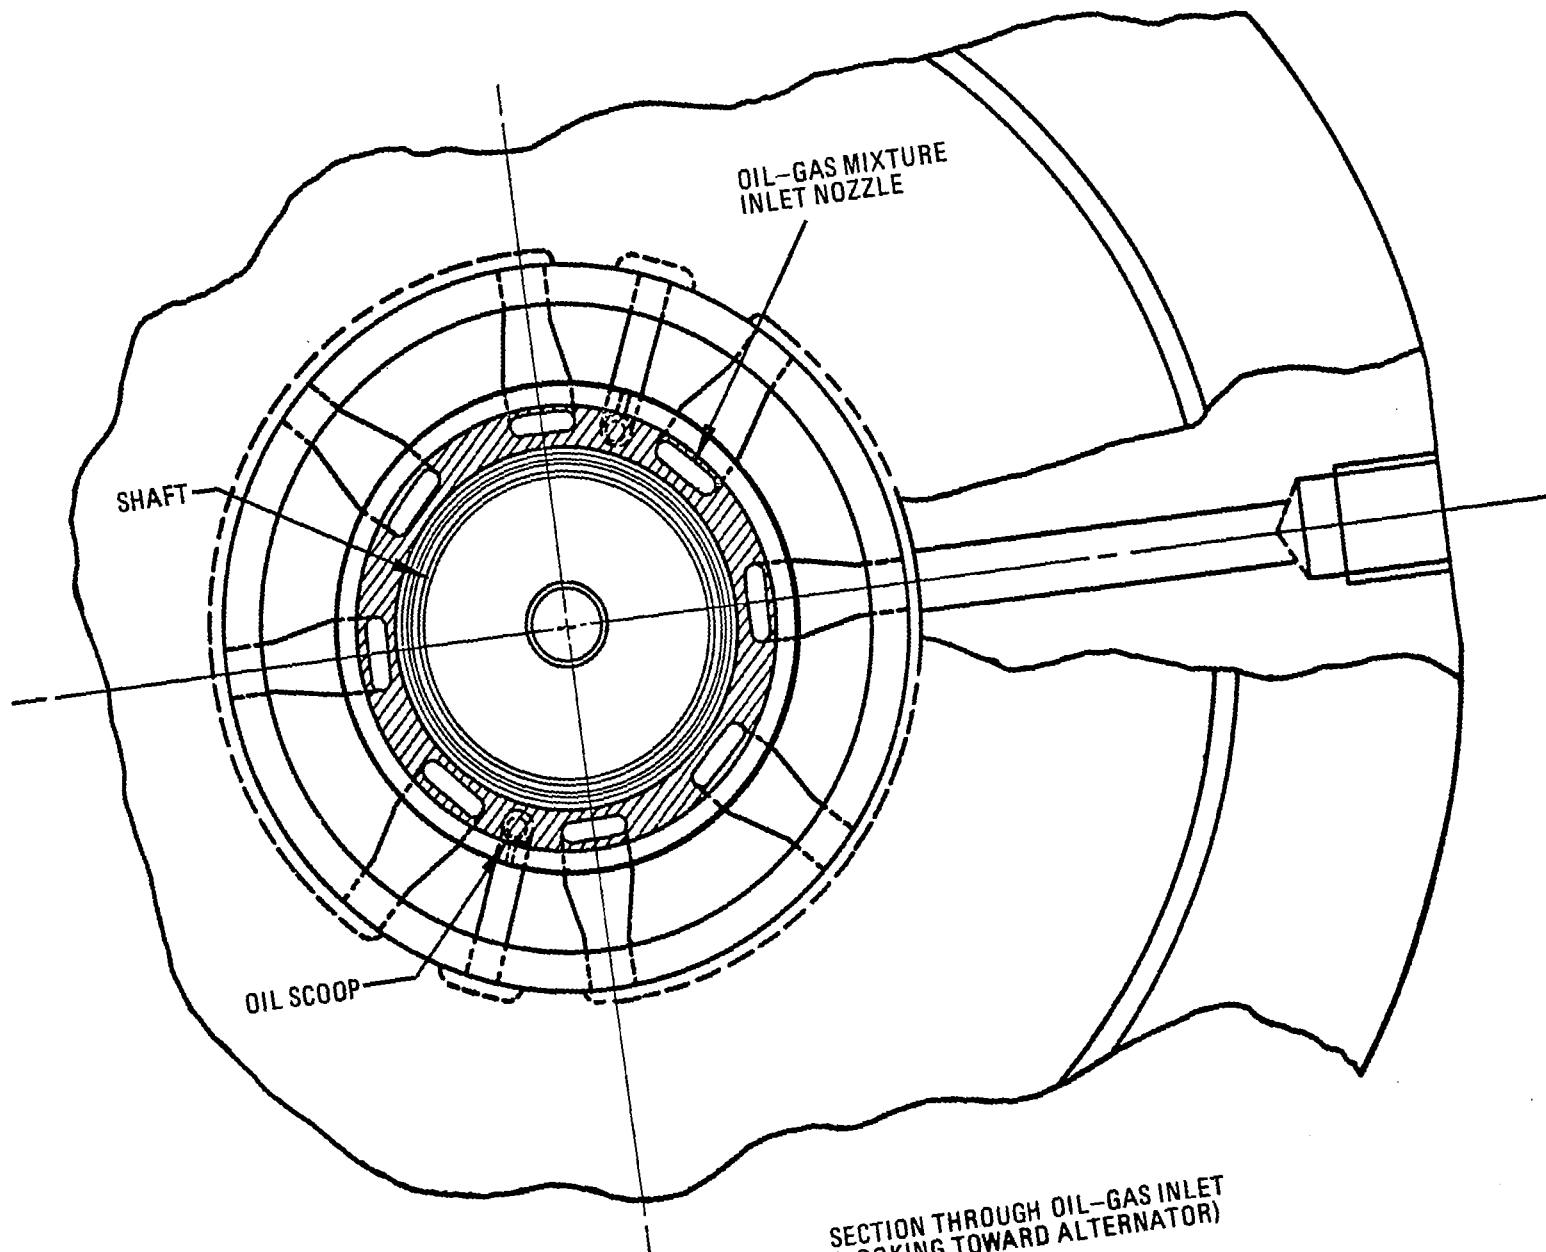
BRU Lubrication System Schematic - Inboard Bearings M-59330
